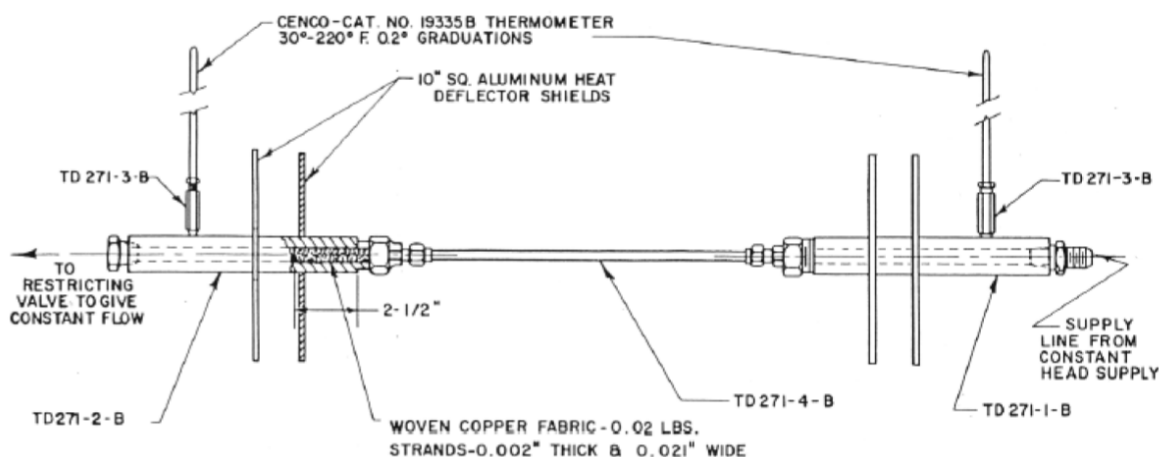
Technical drawing for a calorimeter (BTU heat transfer device) as suggested by the FAA, from [37] under public domain.
